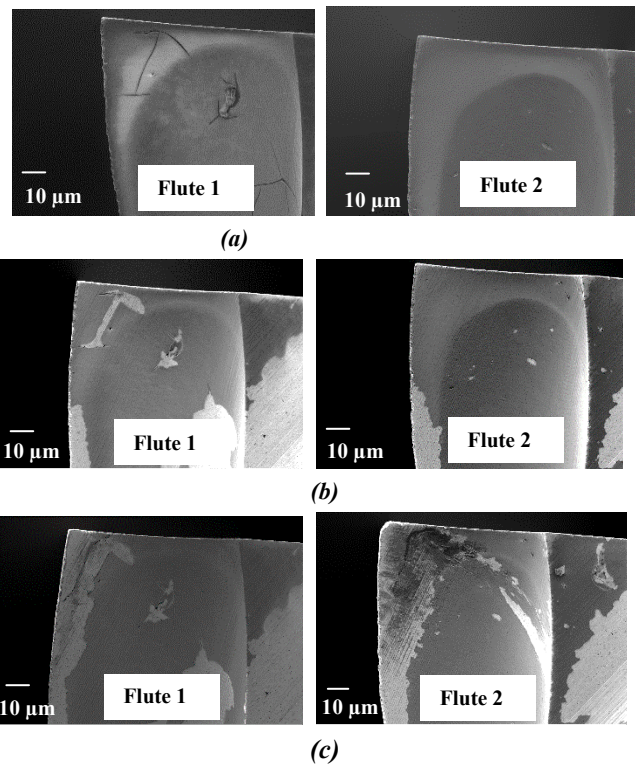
Optical images of a zirconia coated micro end mill (a) before machining and (b) after machining for 50 mm.
